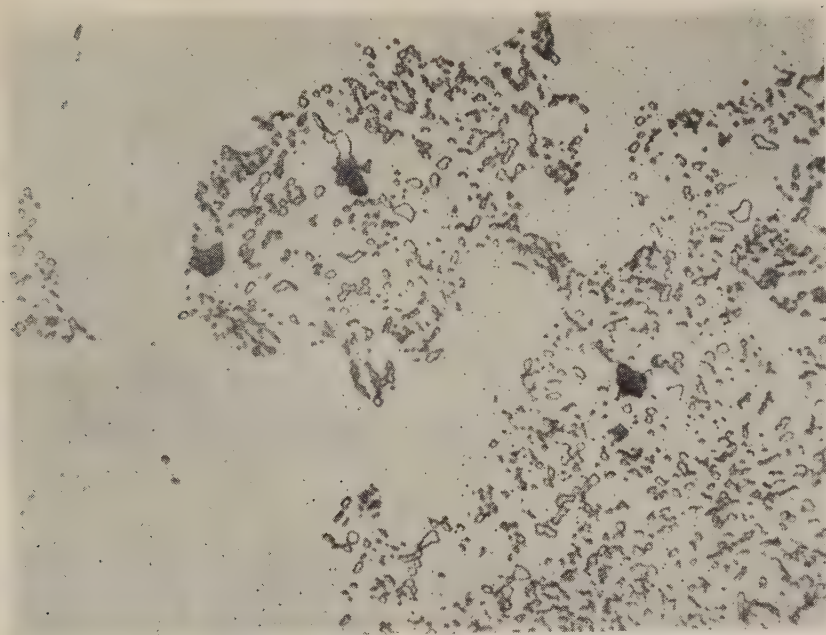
LOW-TEMPERATURE END OF WELD-AFFECTED ZONE IN CREEP-TEST SPECIMEN CASE 3;  $\times 2000$
